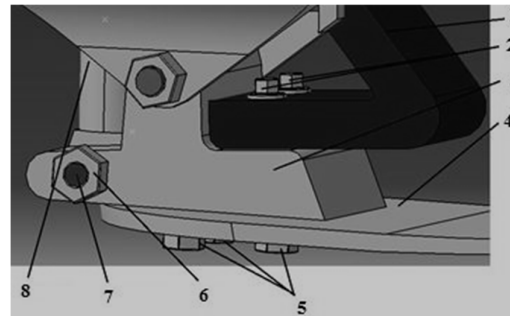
Ankle joint: 1- Lamellar spring, 2- Clamping screws, 3- Ankle joint, 4- Foot, 5- Clamping screws, 6- Screw, 7- Ball nut shaft, 8- Ball nut.
